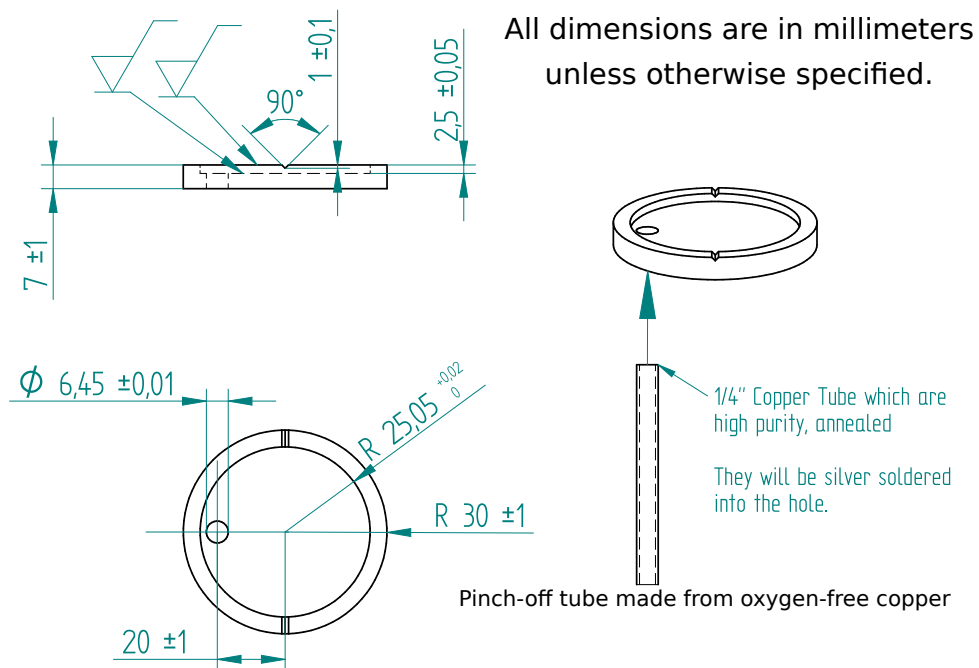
Technical drawing of the top of a puck, containing dimensions used in some modern versions of the design. This side will be downwards facing if using the length of the pinch-off tube to control superfluid film thickness. Stycast epoxy (2850FT) gets applied in a thin layer around the extended edge and filling the v-shaped grooves before the top and base of the puck are pressed together.
